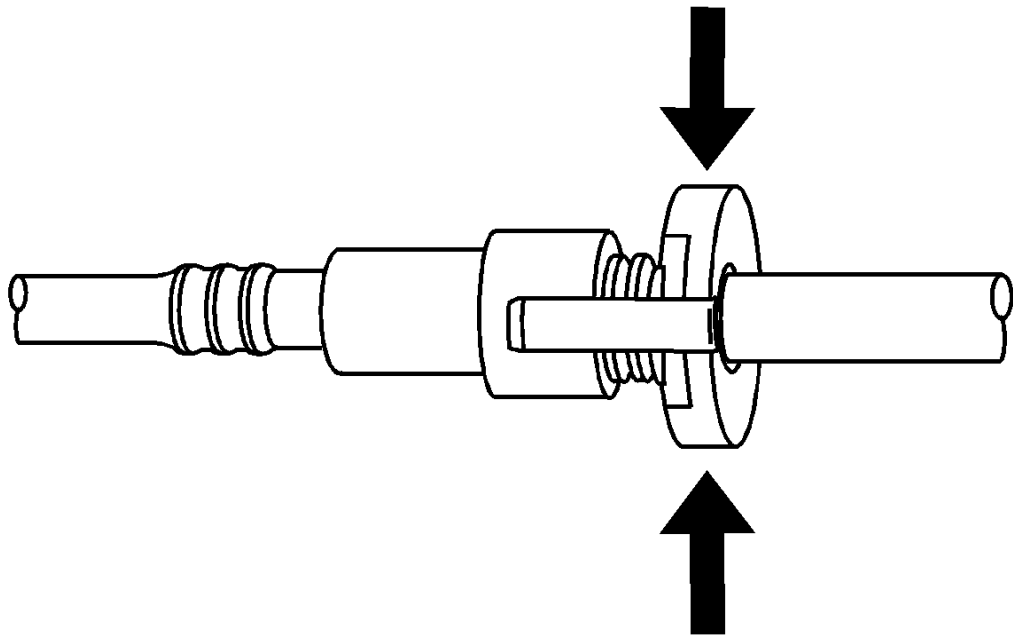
Disengaging Quick Connect Fitting (Plastic Collar)
